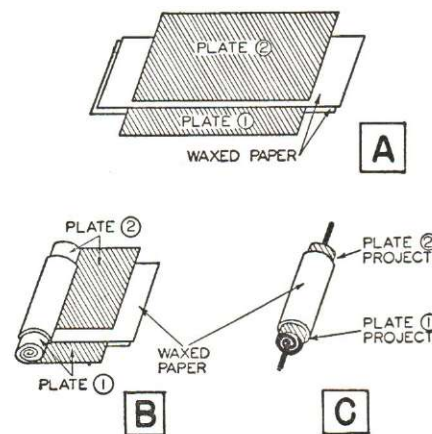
How paper condensers are made. Waxed paper sheets separate the plates, which are tin or aluminum-foil sheets. After the condenser is rolled up, the projecting ends of the plates are crimped around the spirals formed by the connecting wires. The wires are soldered to tin-foil plates but cannot be soldered to aluminum-foil plates. Instead, the wire spiral is filled with solder and is pressed tightly into the foil. This mechanical joint is held only by wax and the container, so frequently comes apart.
